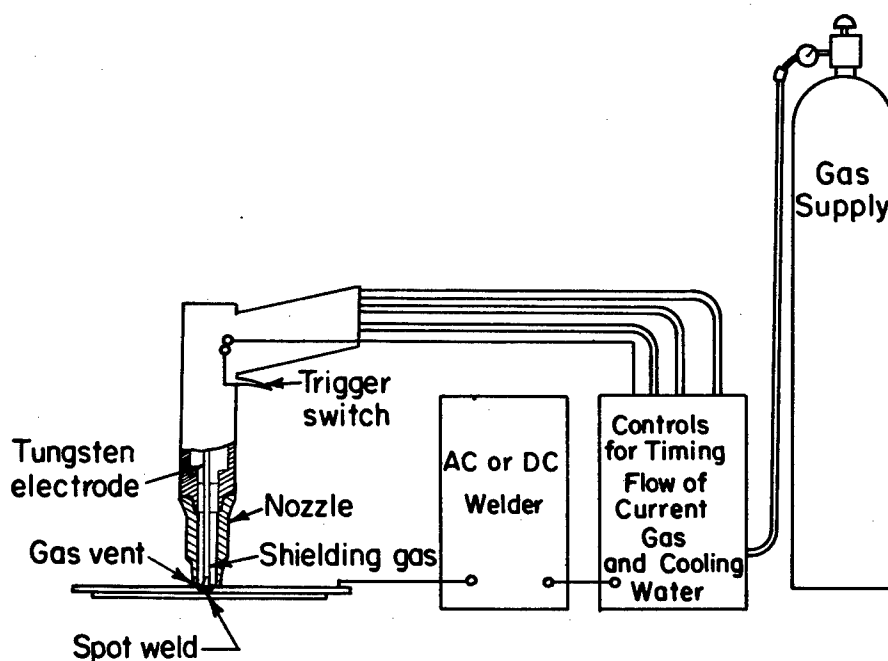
SCHEMATIC DIAGRAM OF SETUP FOR MANUAL GAS-TUNGSTEN-ARC SPOT WELDING
